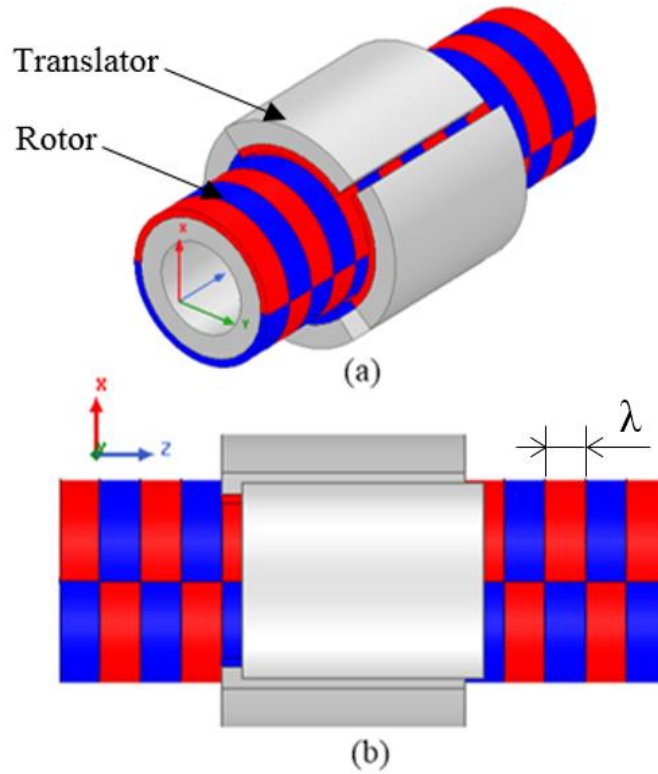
1. View of a linear to rotary magnetic gear; (a) 3D view, and (b) side view
